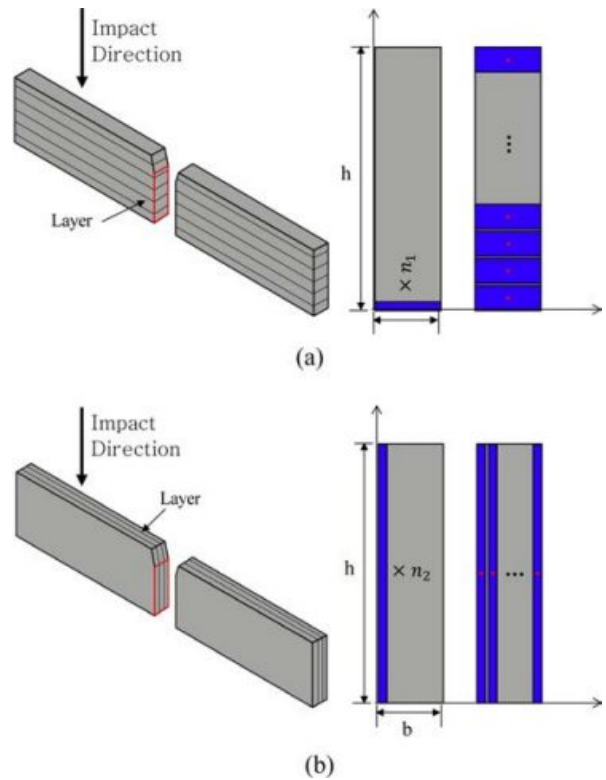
Addition of layers by building direction: (a) building in width direction; (b) building in thickness direction.
